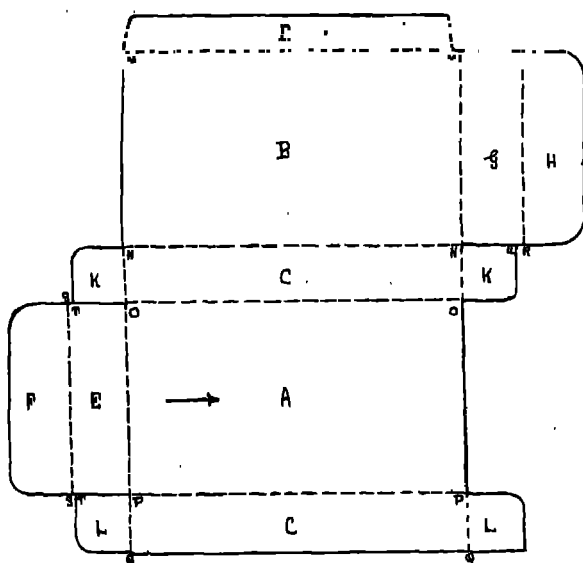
SINGLE-PIECE HAIRPIN PACKET.
